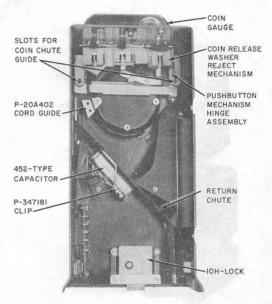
Upper Housing, Coin Chute Assembly Removed
